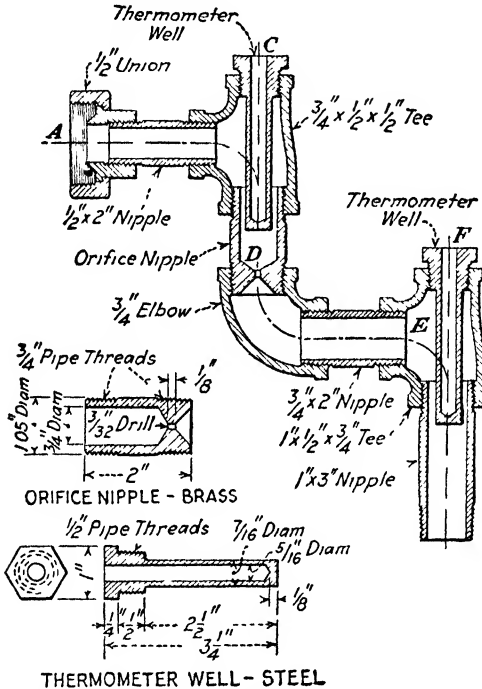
A throttling (or superheating) calorimeter (Courtesy, Blaw-Knox Co.)
